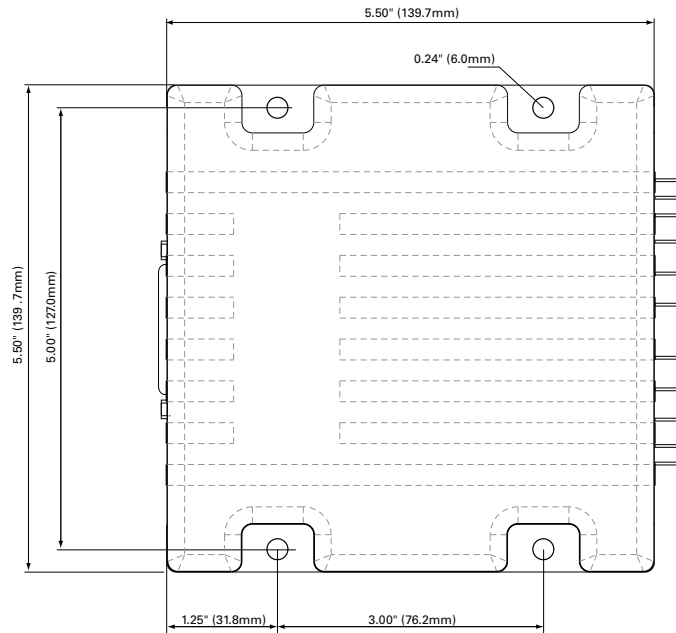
FBLG2360T top view and dimensions Mechanical Specifications
